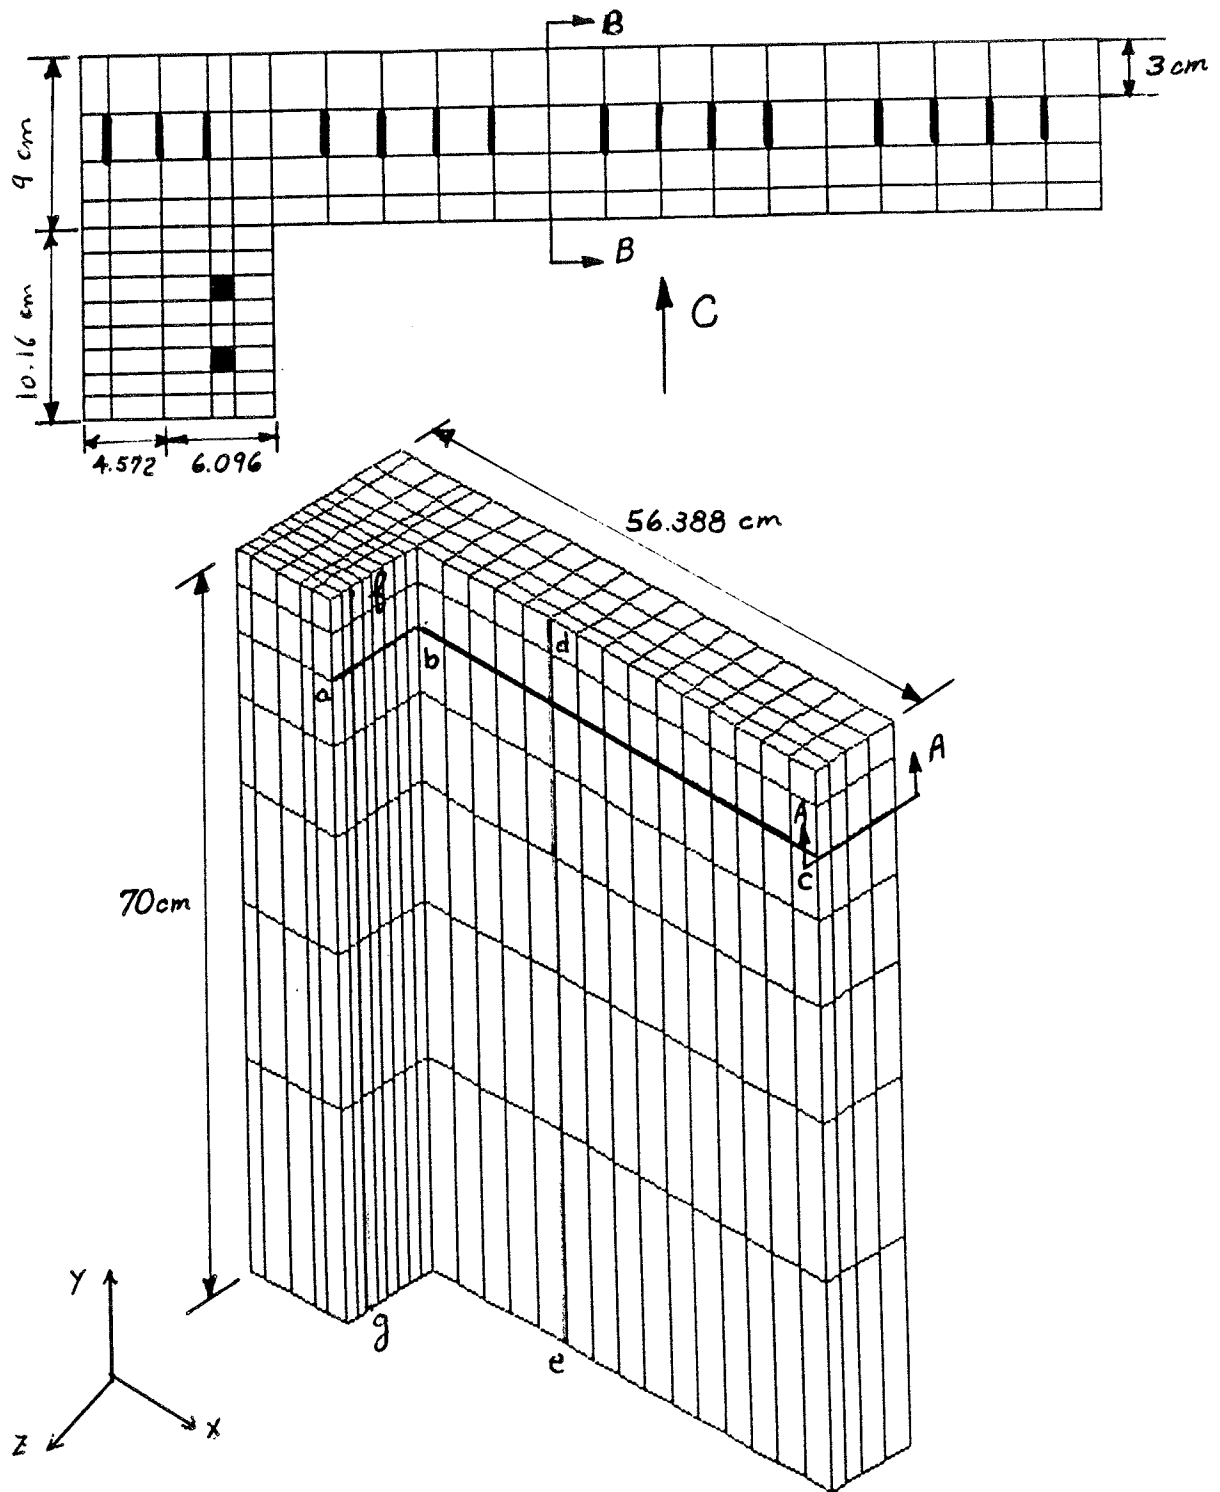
Schematic showing sections & dimensions of quarter mold.
